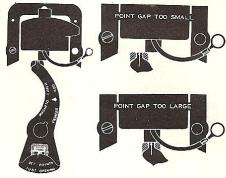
Edge gap can be checked using special tool number 426847. Edge gap can be changed slightly by changing the point gap.
